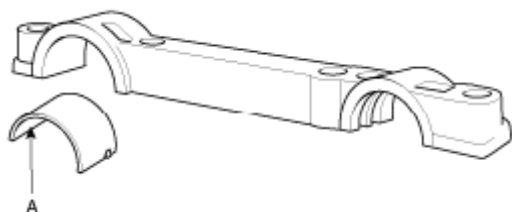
Identifying Exhaust Cam Shaft Upper Bearing
